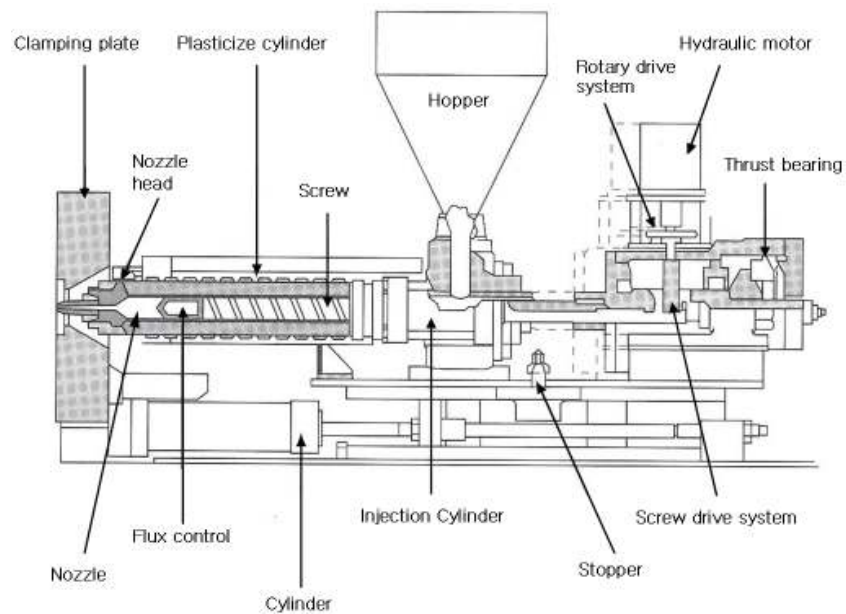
A Schematic diagram of screw type injection molding machine
